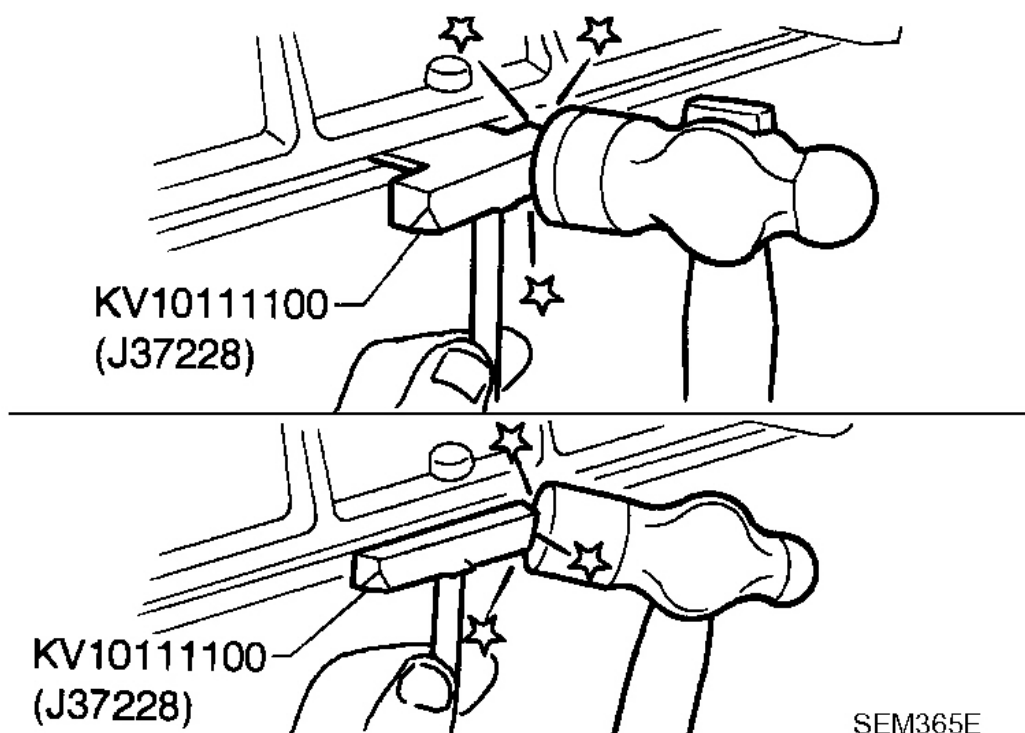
Sliding Seal Cutter By Tapping On Side Of Seal Cutter With Hammer
